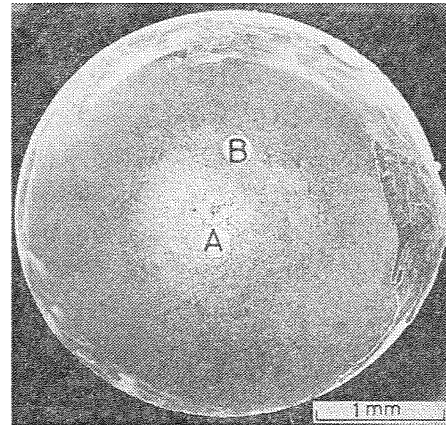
(a) Fracture surface of wire (torsion)
